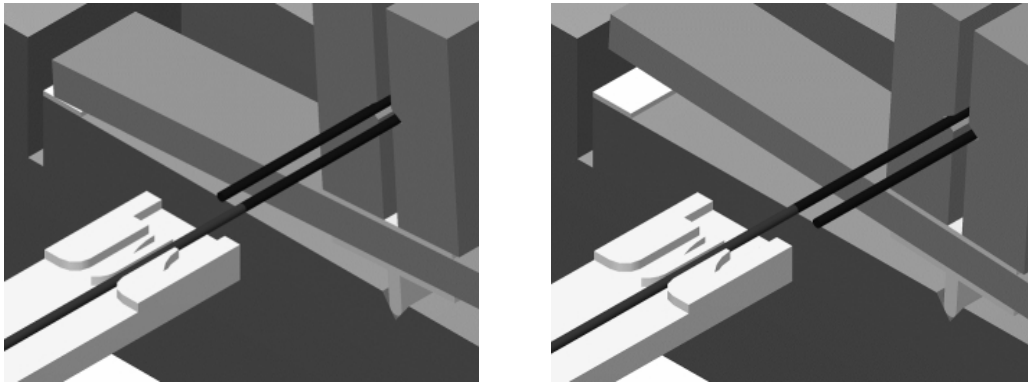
The exploded isometric view of the 1x2 mechanical optical switch
